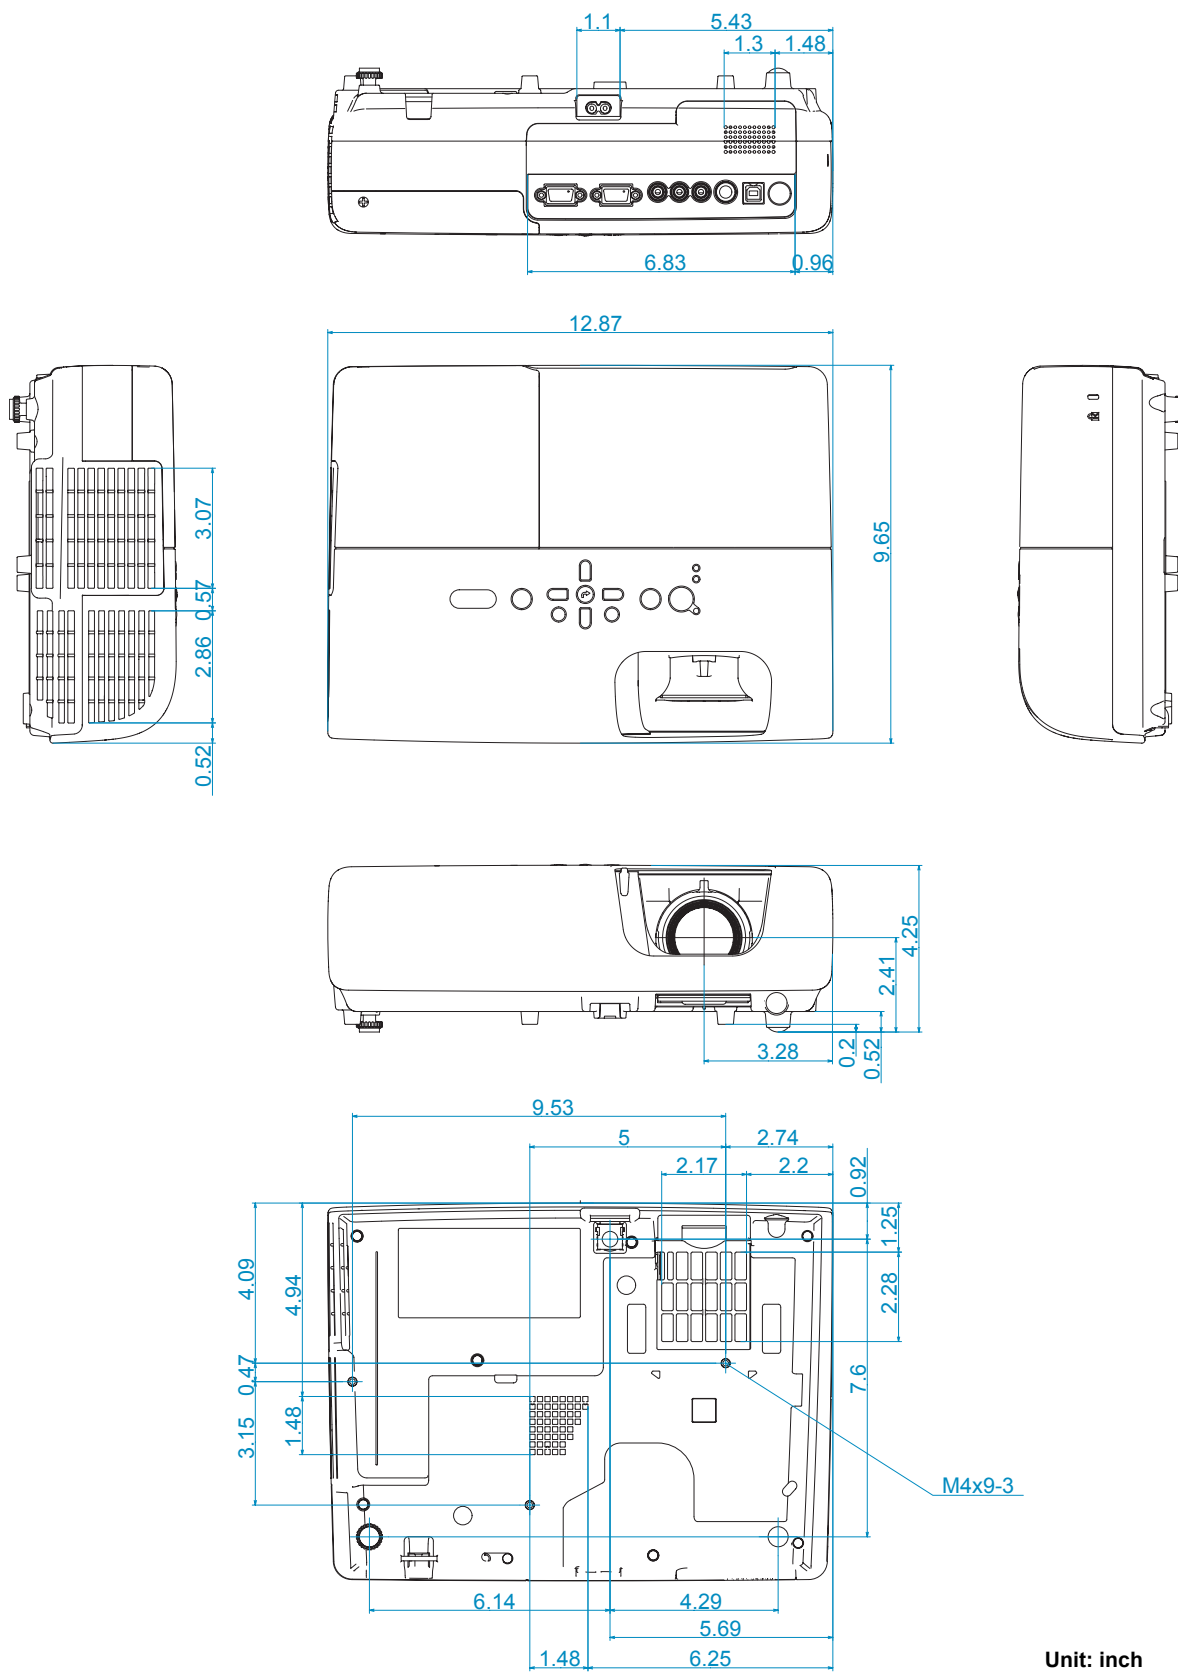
External Dimensions (EMP-X5/S5) (mm)
